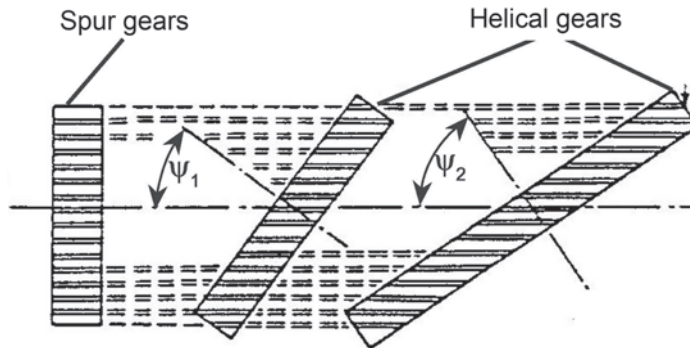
By varying the helix angle, Ψ , a single gear spur can be replaced by a number of helical gears.
